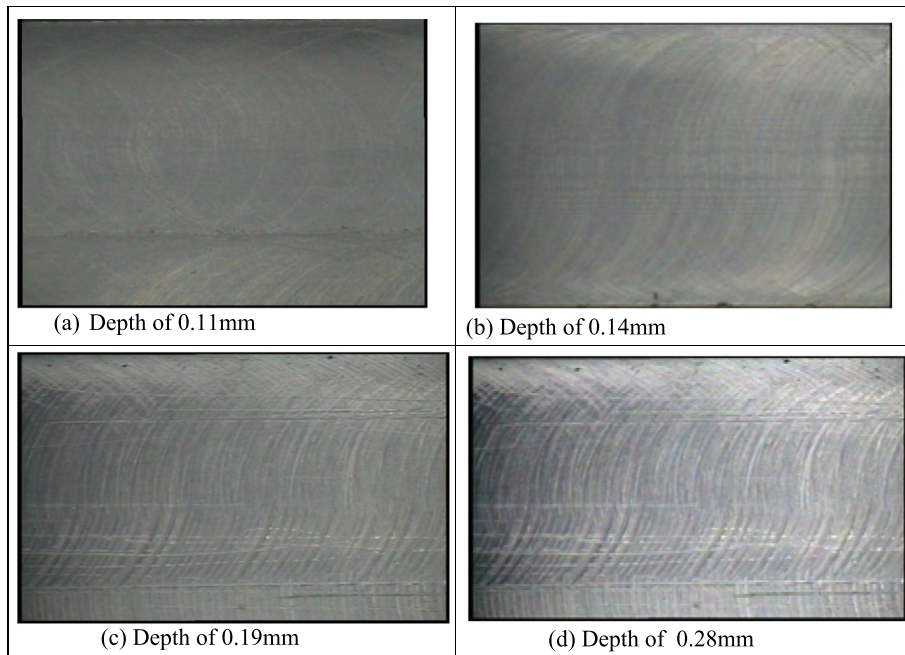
Optical surface images of the machined surfaces at the different depths of cut
